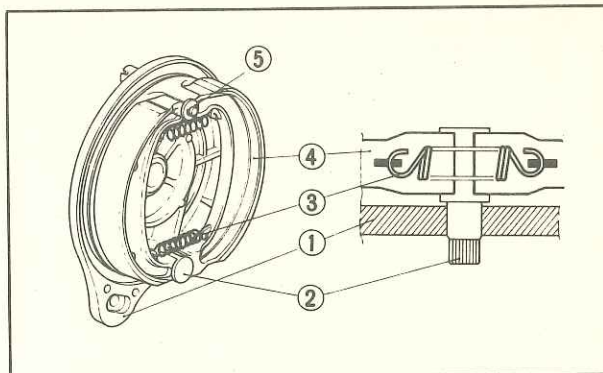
(1) Front brake panel (4) Brake shoe
